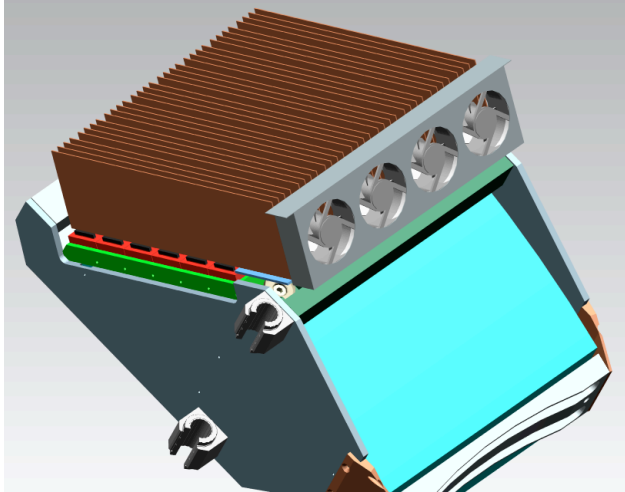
The FBLOCK equipped with the boards and fan tray
